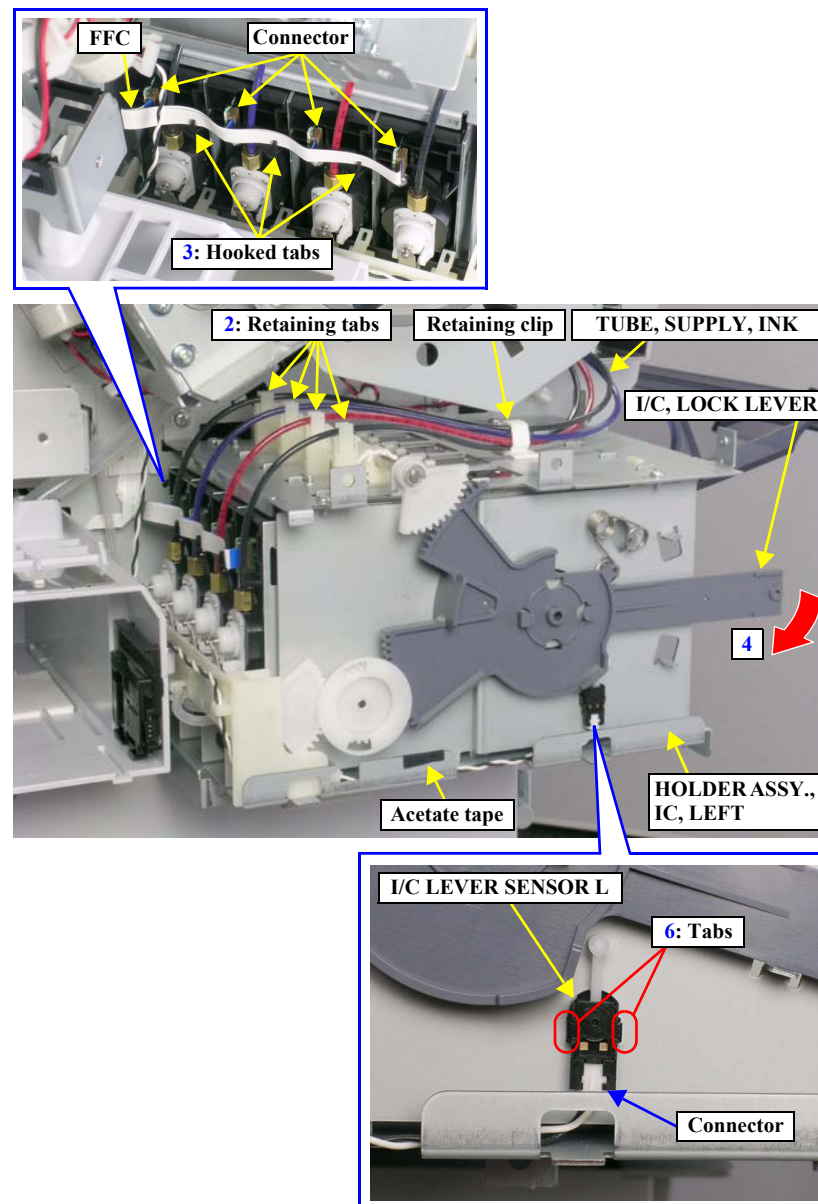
Releasing the TUBE, SUPPLY, INK and Removing the I/C LEVER SENSOR L
